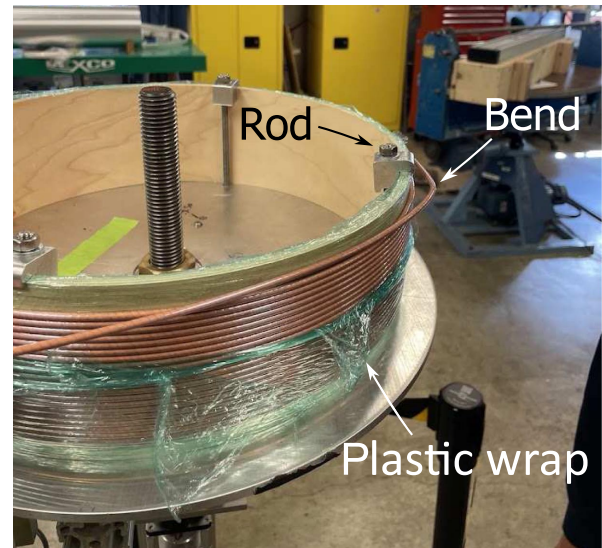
Layer 4 wire came off from the top of the spool and was bent by the nearby threaded rod. The bend was partially straightened as we wrapped the CORC[®] wire back to the spool.
